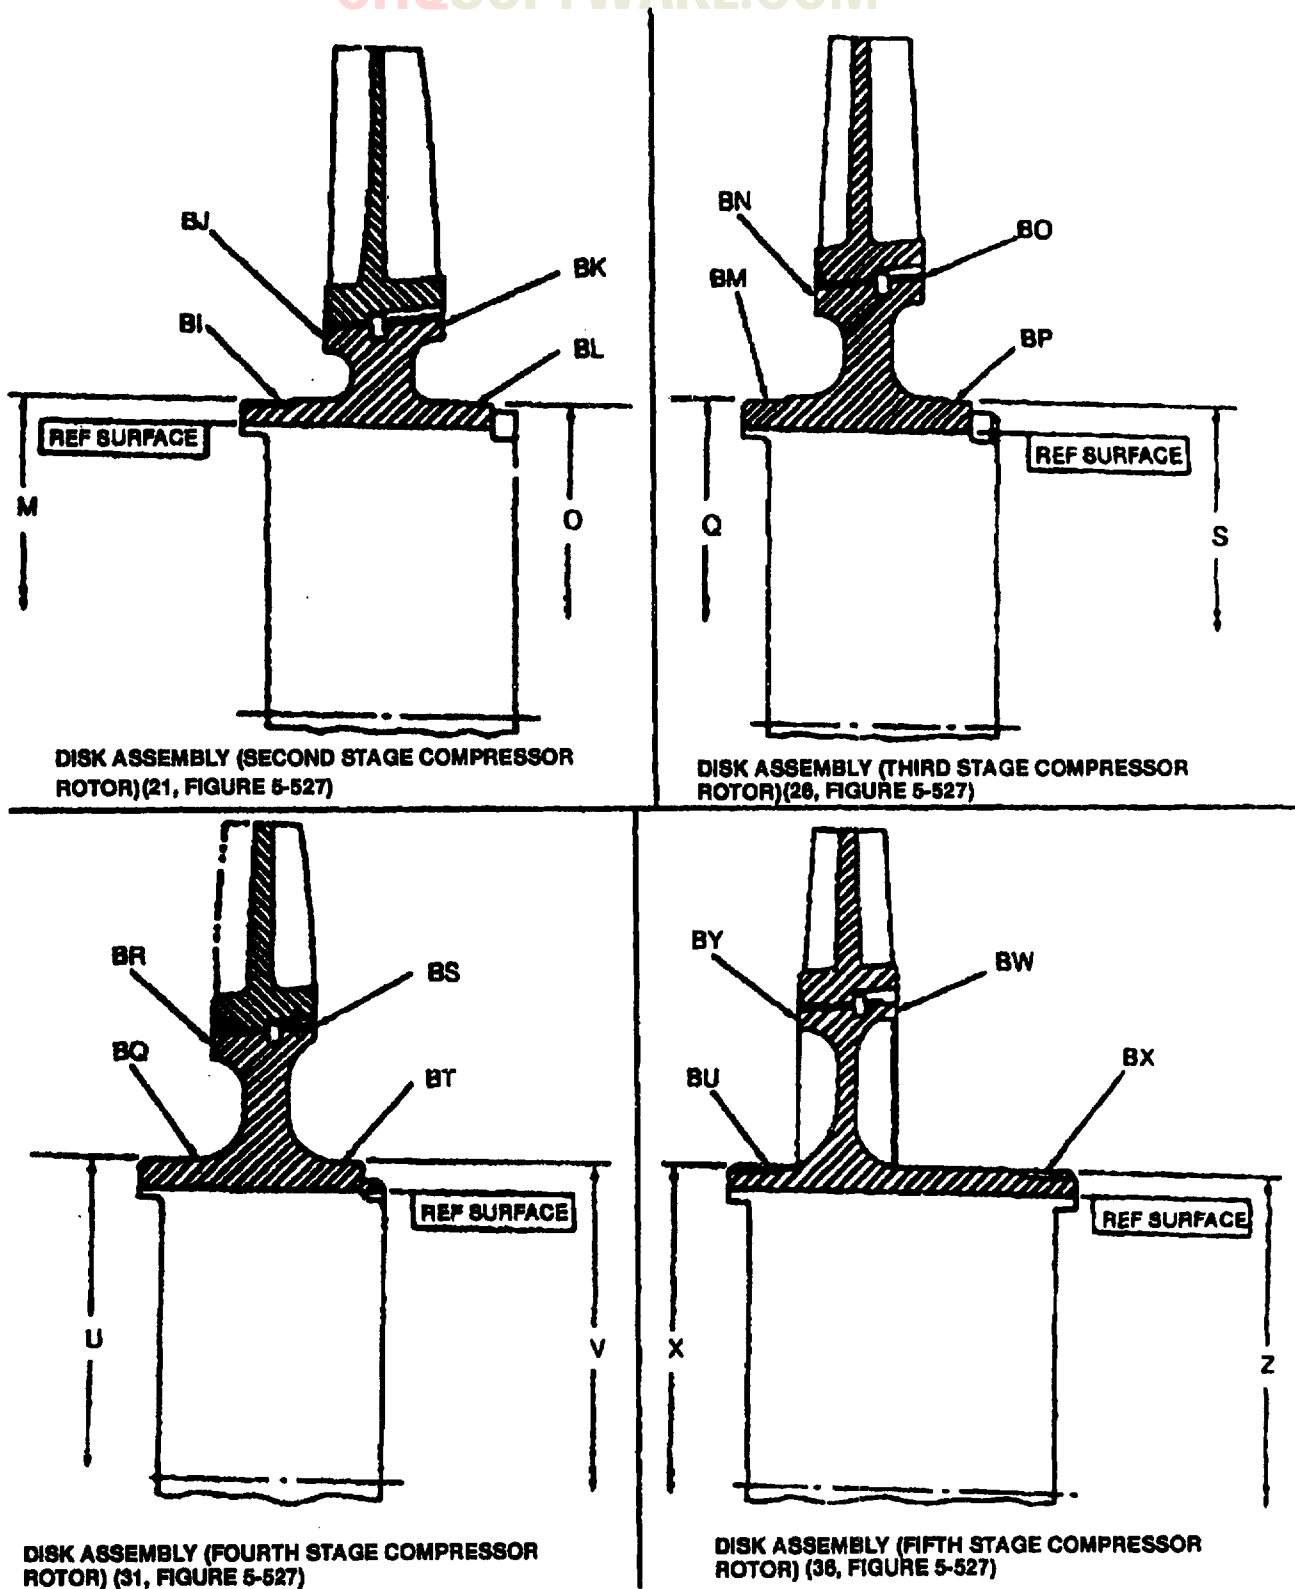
Compressor Rotor Assembly Dimensional Inspection Locations (T53-L-15, -701)
